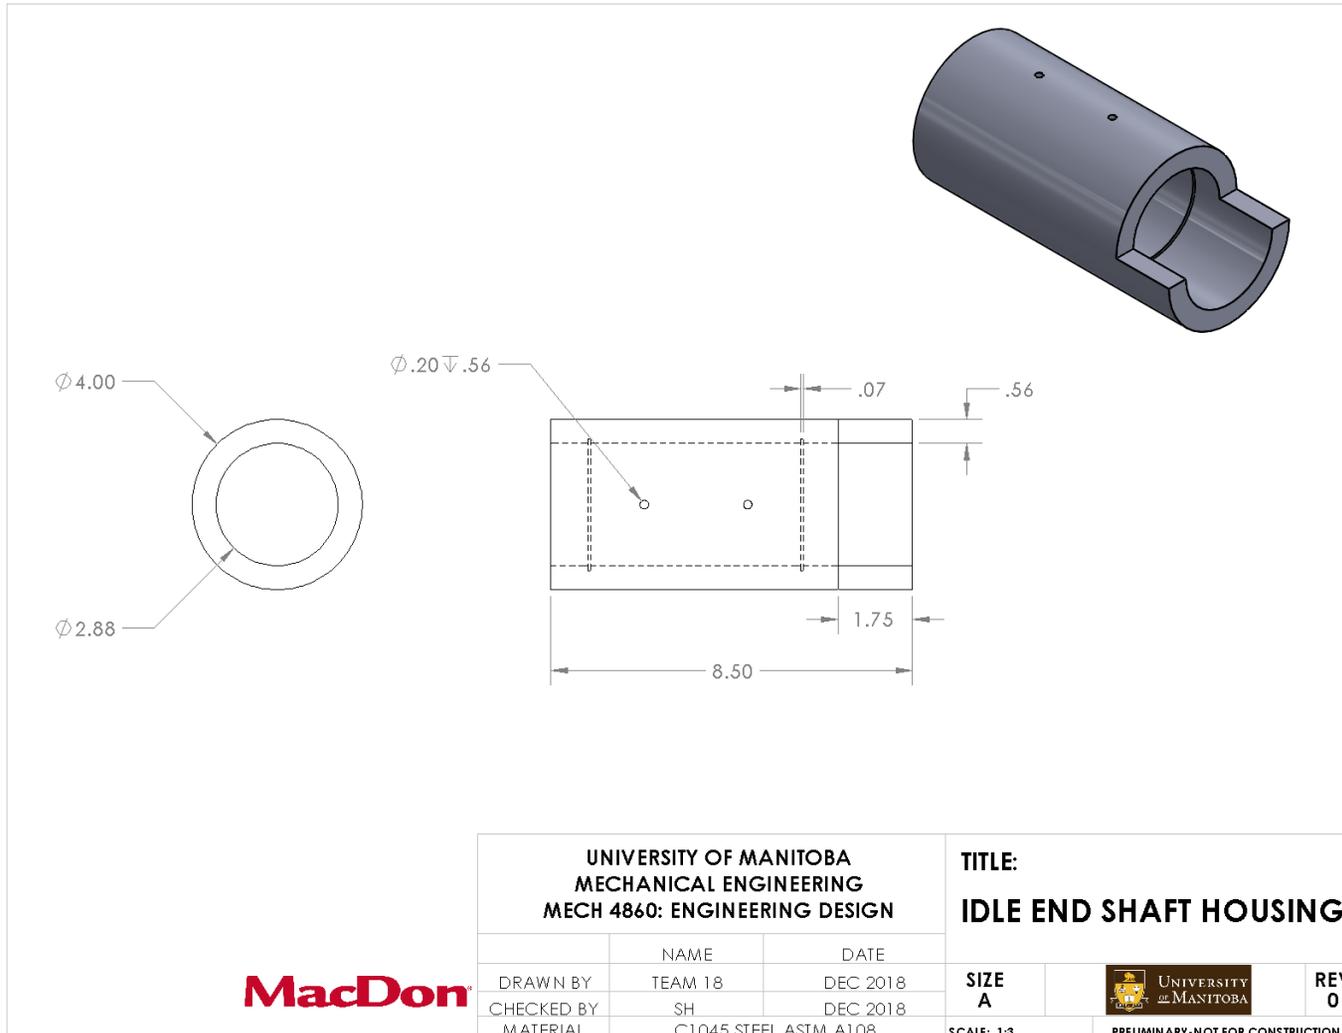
Preliminary Drawing for the Idle End Shaft Housing
